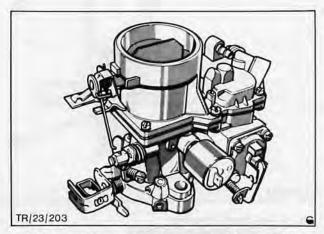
Motorcraft manual choke carburettor (By-pass idle) A – Idle speed adjusting screw
